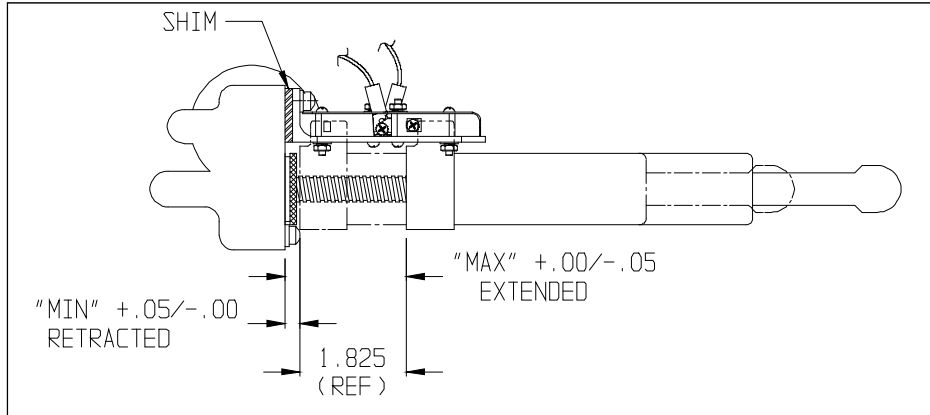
Trim Actuator Limits with Shim(s) Installed
